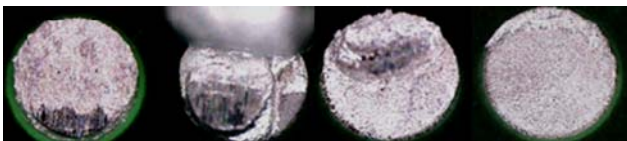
Examples of ball shear fracture type showing from left to right Modes A, B, C and D
